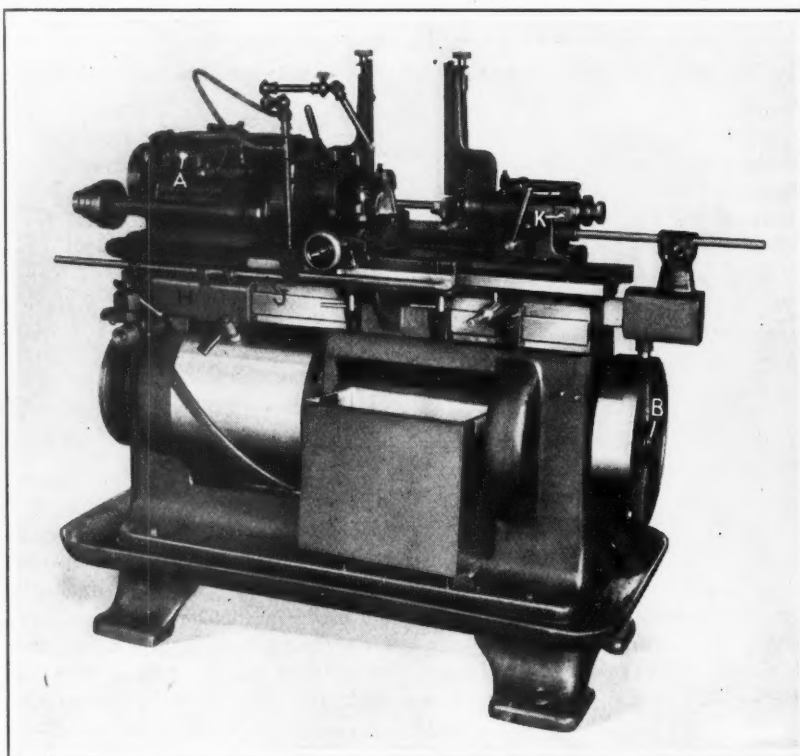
Geared-head Automatic Lathe developed by the Pratt & Whitney Co.
